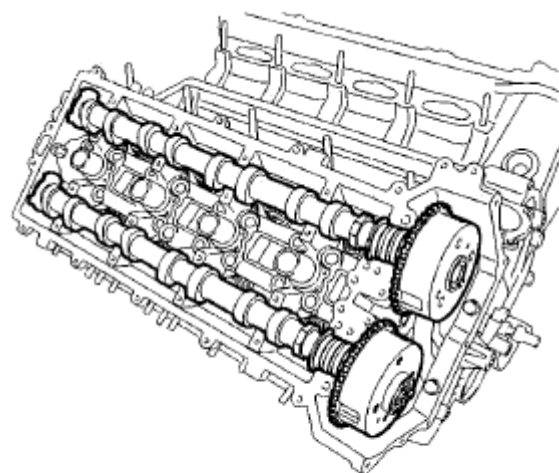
Identifying Camshaft Bearing Caps And Camshaft Thrust Bearing Cap Bolts
